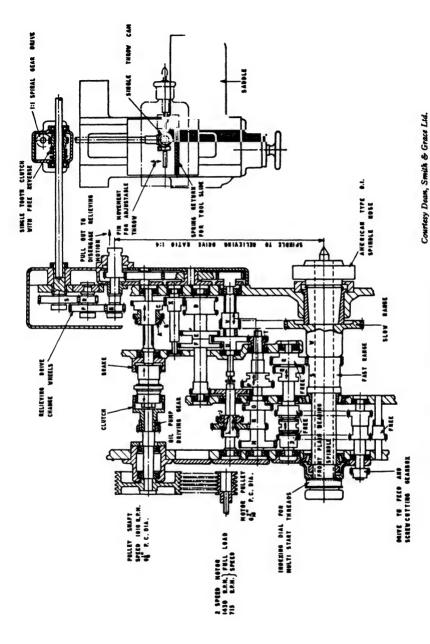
(a)—Schematic Layout of Relieving Mechanism.
